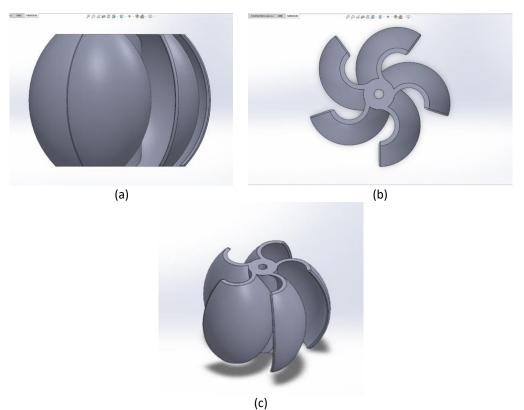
3D design of the turbine reflector (a) front view (b) side view (c) isometric view
